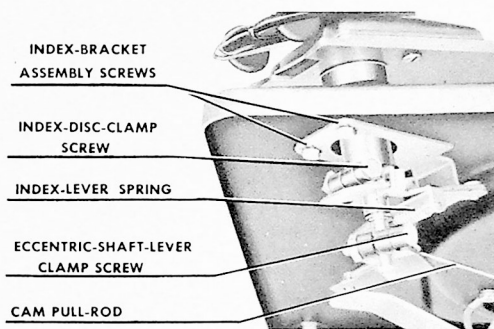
INDEX-BRACKET, INDEX-DISC, AND ECCENTRIC-SHAFT-LEVER ASSEMBLIES.
